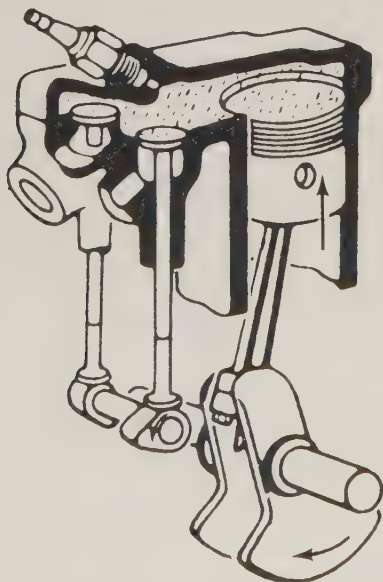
Compression stroke. Both valves are closed, and the piston is moving upward, compressing the mixture. (Clinton Engines Corporation)
